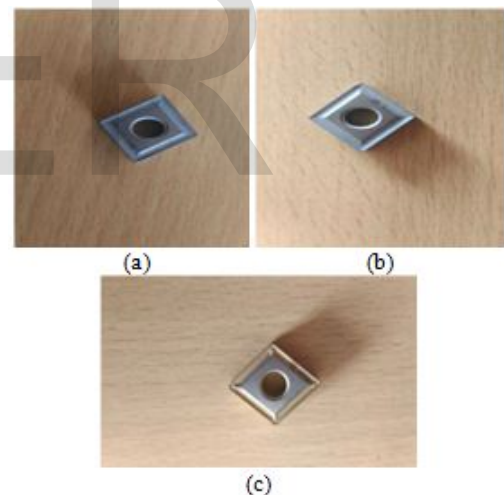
Tool inserts (a) TTR, (b) TTS, (c)K10P
